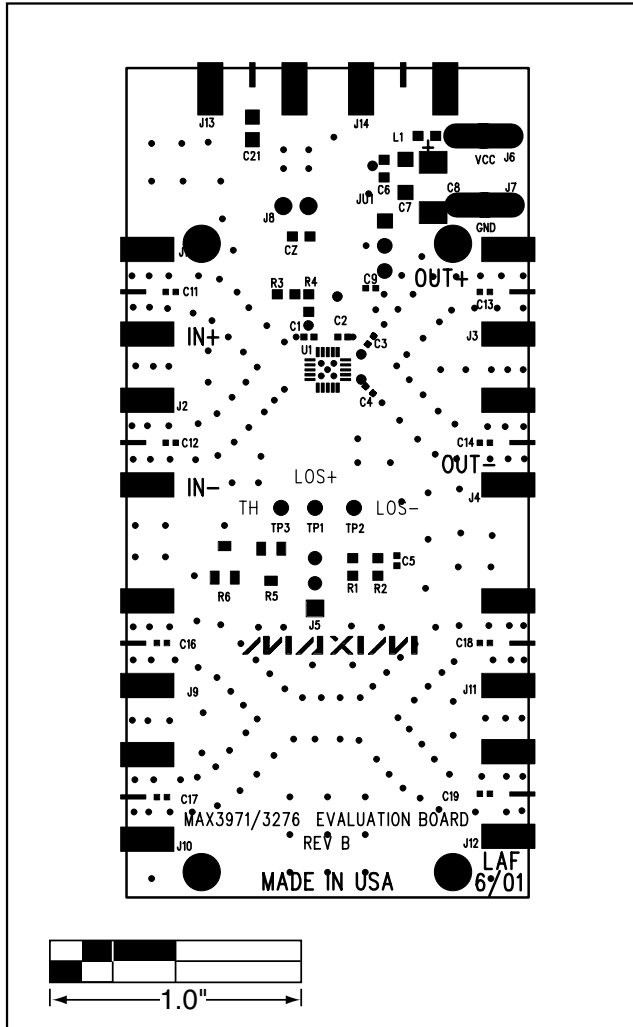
MAX3971 EV Kit Component Placement Guide—Component Side
